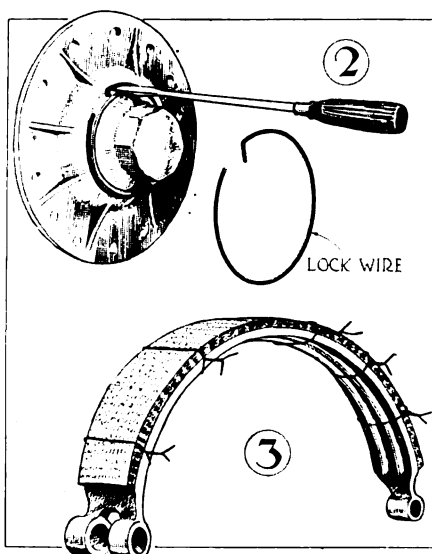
The wheel-hub locking ring holds the hub cap to the hub and can be removed by inserting a screw driver as shown
